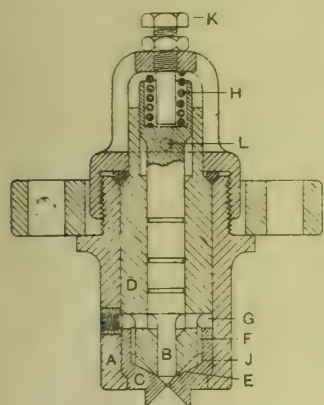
OIL SPRAYER FOR INTERNAL-COMBUSTION ENGINES.
